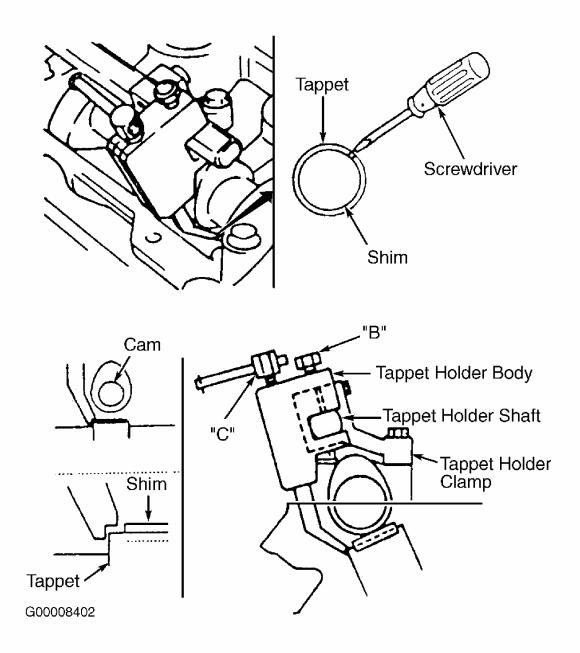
Identifying Valve Tappet Holder & Adjustment Procedure Courtesy of MAZDA MOTOR CORP.
